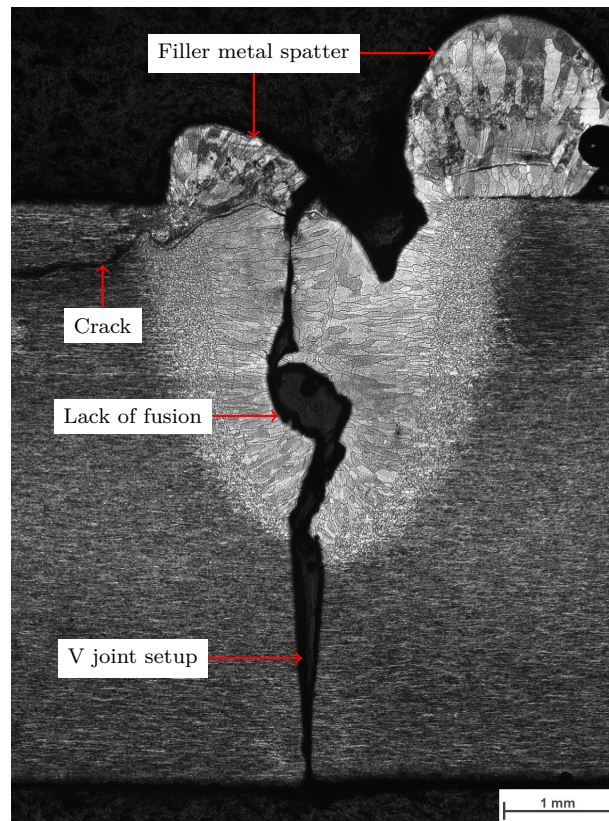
EB weld of 5 mm TZM with filler metal inserted into the full penetration beam. The V joint setup is still visible due to a lack of fusion and further, spatter is observed on the surface of the TZM sheets.
